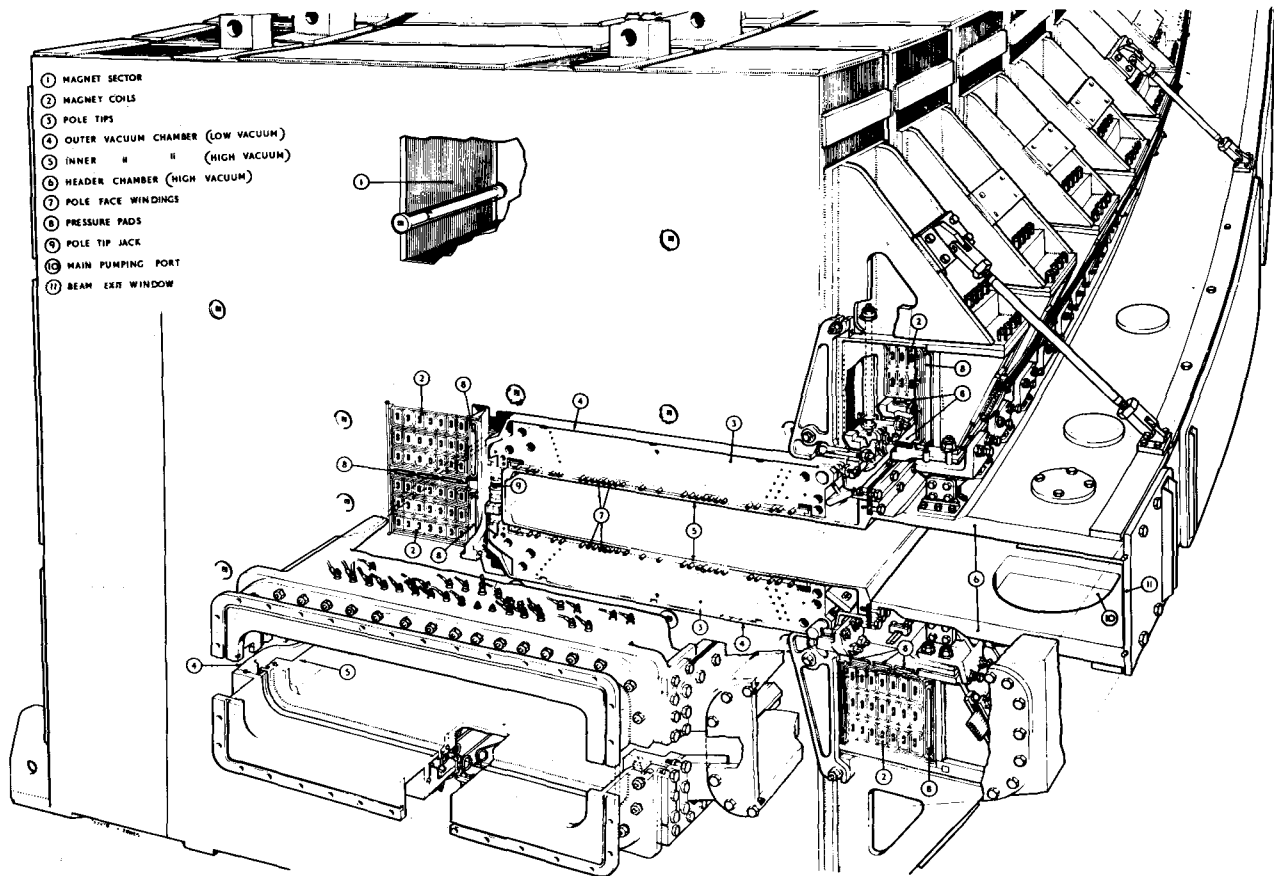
Nimrod magnet - vacuum vessel assembly.
